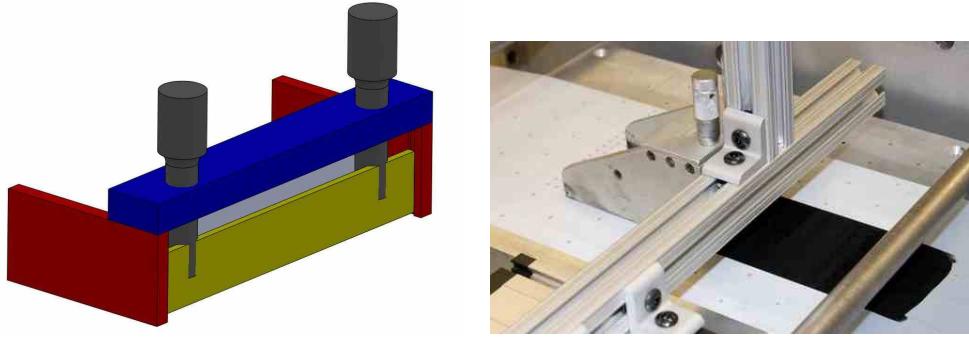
CAD model of tape casting module and actual tape casting results on machine
